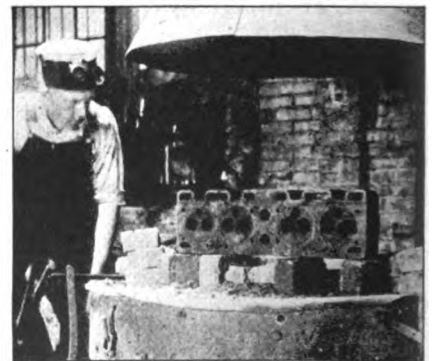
THE FIRST PREHEATING POSITION OF THE FRACTURED CYLINDER HEAD
